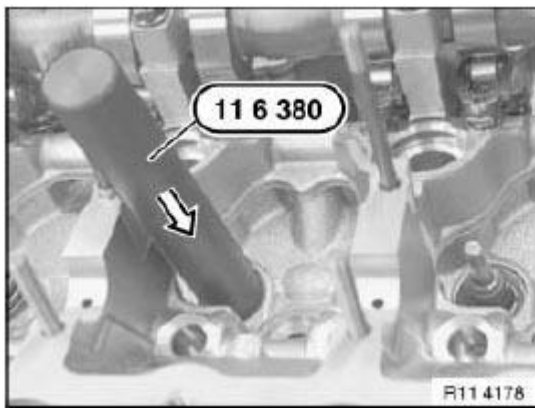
Pressing Valve Stem Seal With Special Tool (11 6 380)
